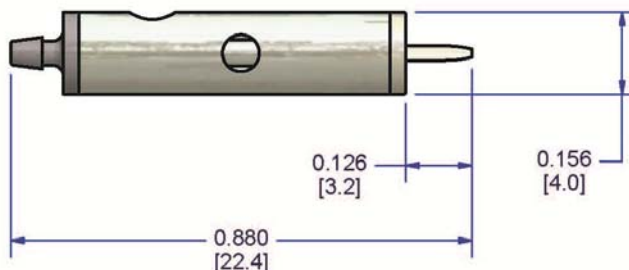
Physical Dimensions of MJ-AB-01 (in inches)
